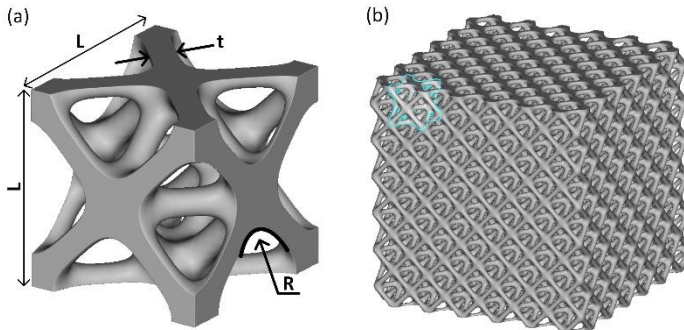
The geometry of the octet truss lattice samples, (a) Unit cell configuration parameter definition of in-plane geometry (R = fillet radius, t = strut thickness, and L = cell size or strut length) and (b) assembled design for mechanical testing.
